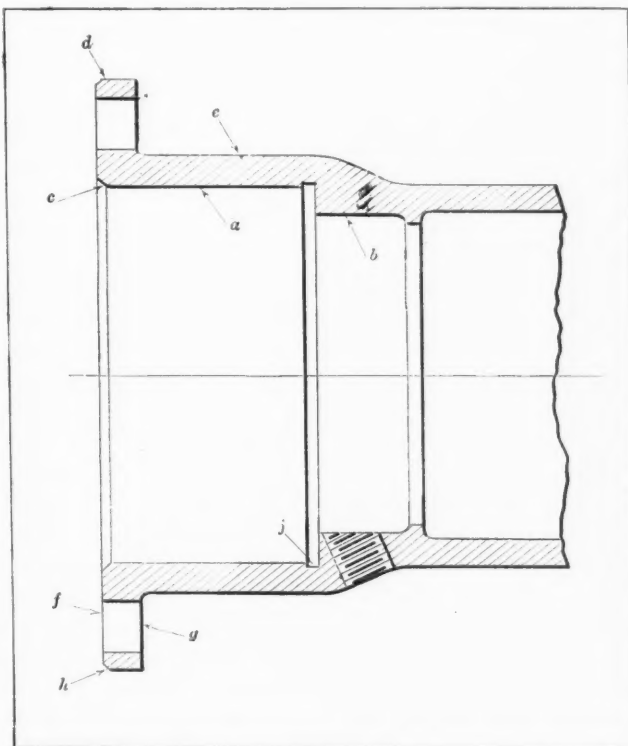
Drawing Showing Construction of Each End of Plymouth Rear-axle Housings
